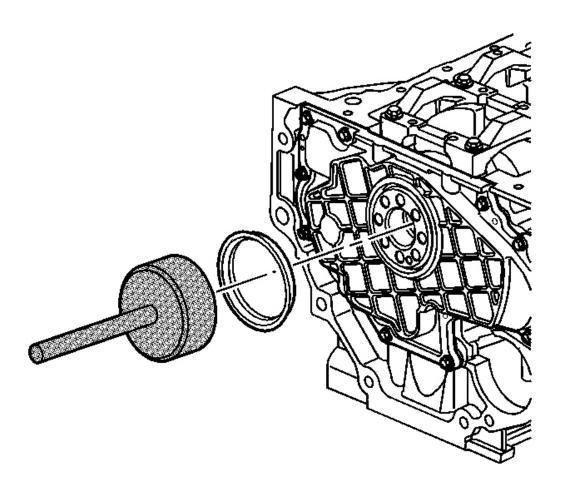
Installing Crankshaft Rear Oil Seal Courtesy of GENERAL MOTORS CORP.
